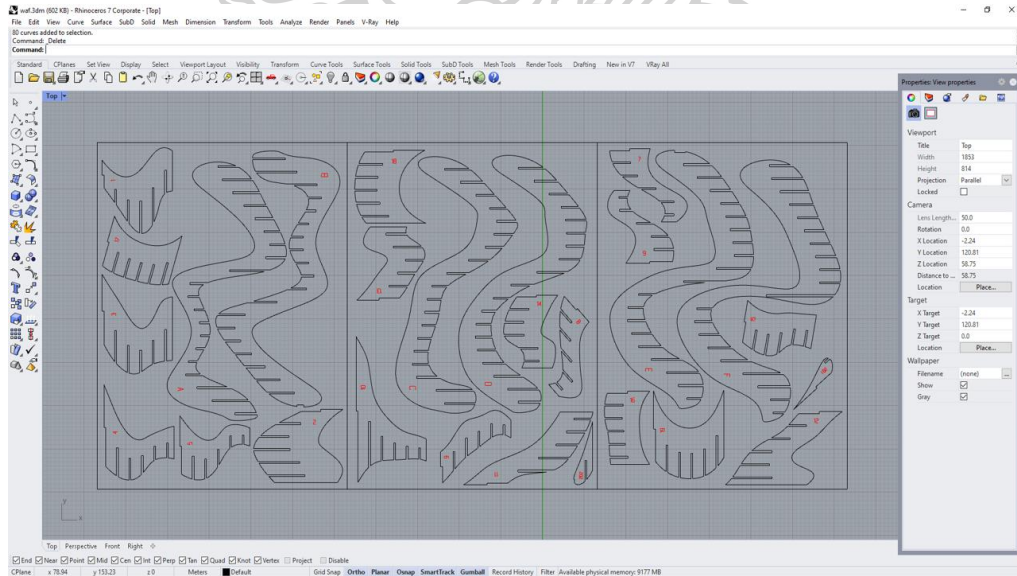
Technical drawing and numbering from a 3D model to send a 2D file to cut the material on a laser cutter or CNC machine.
